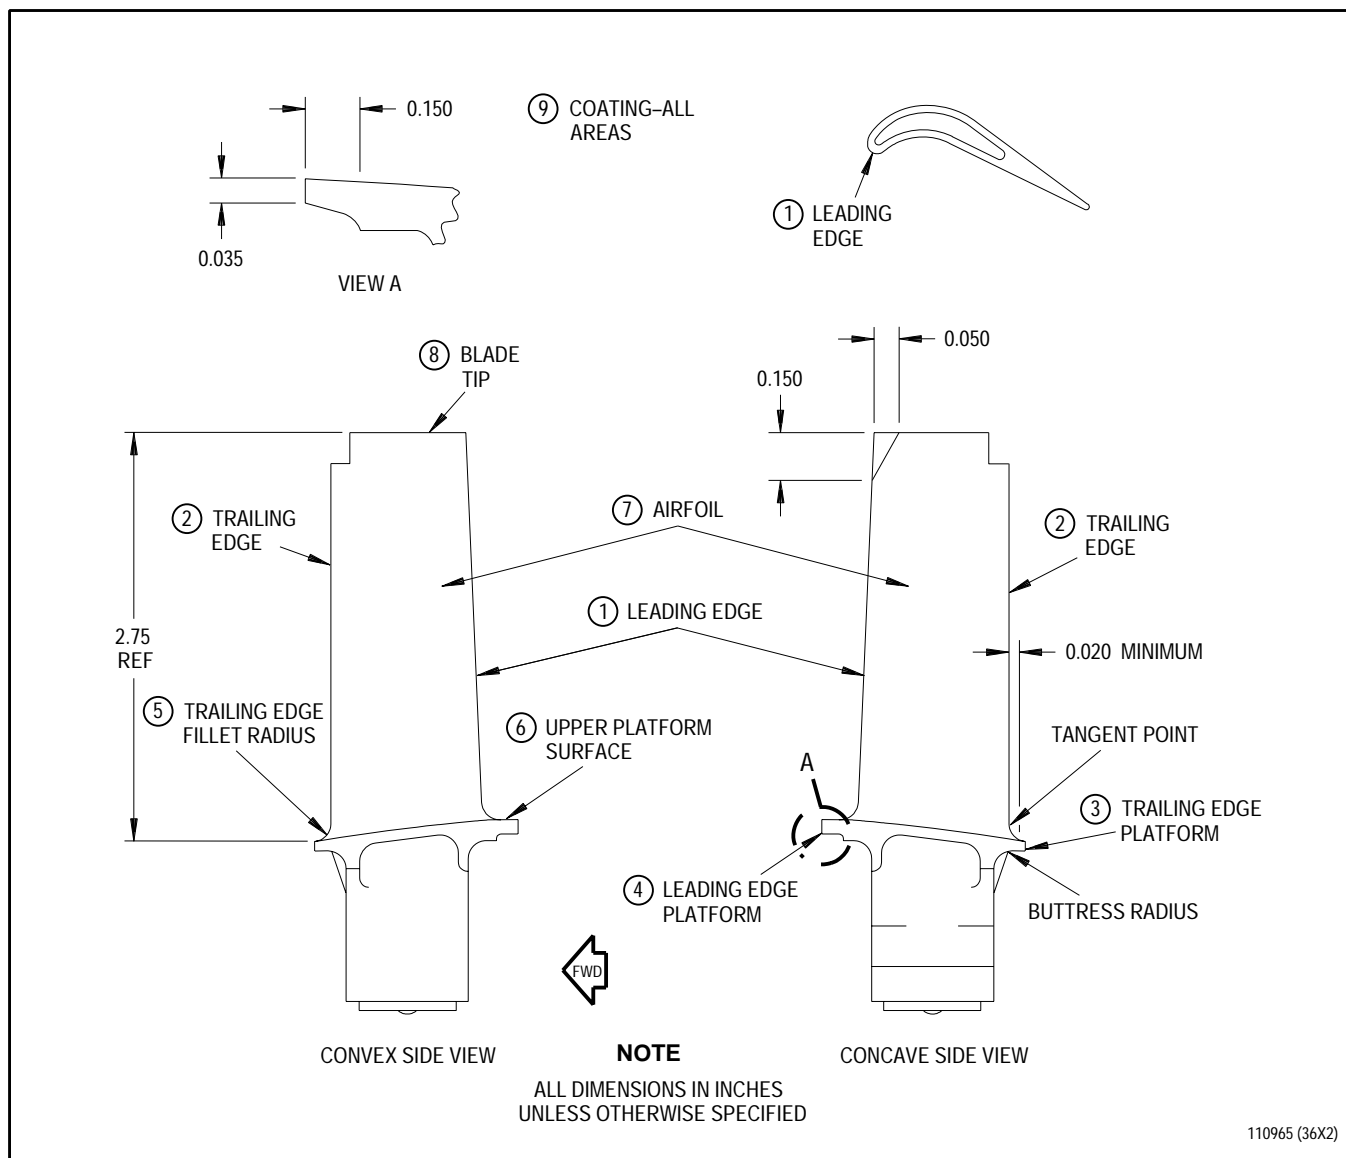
Second Stage Turbine Rotor Blade - Inspection
